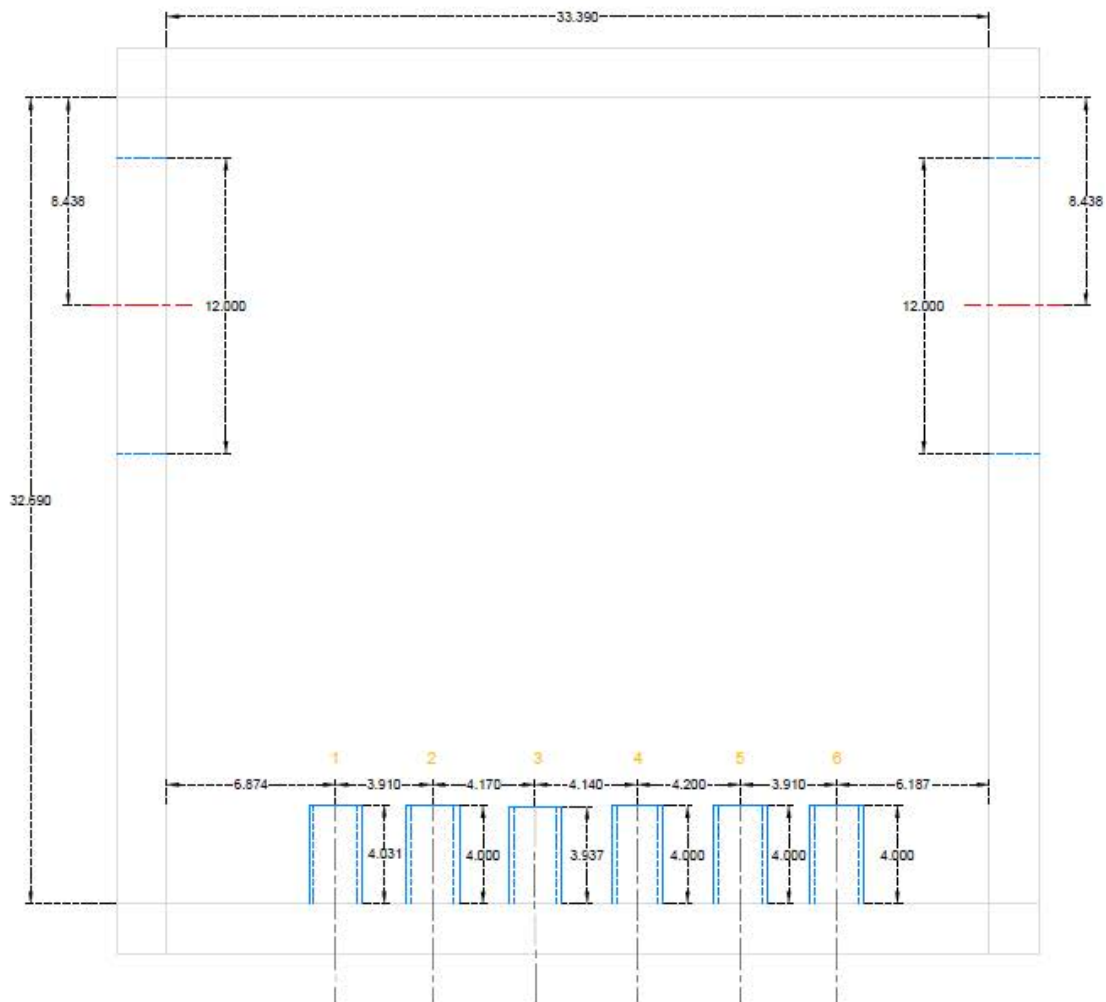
As-built dimensions of outlet plenum (front view; in inches).
